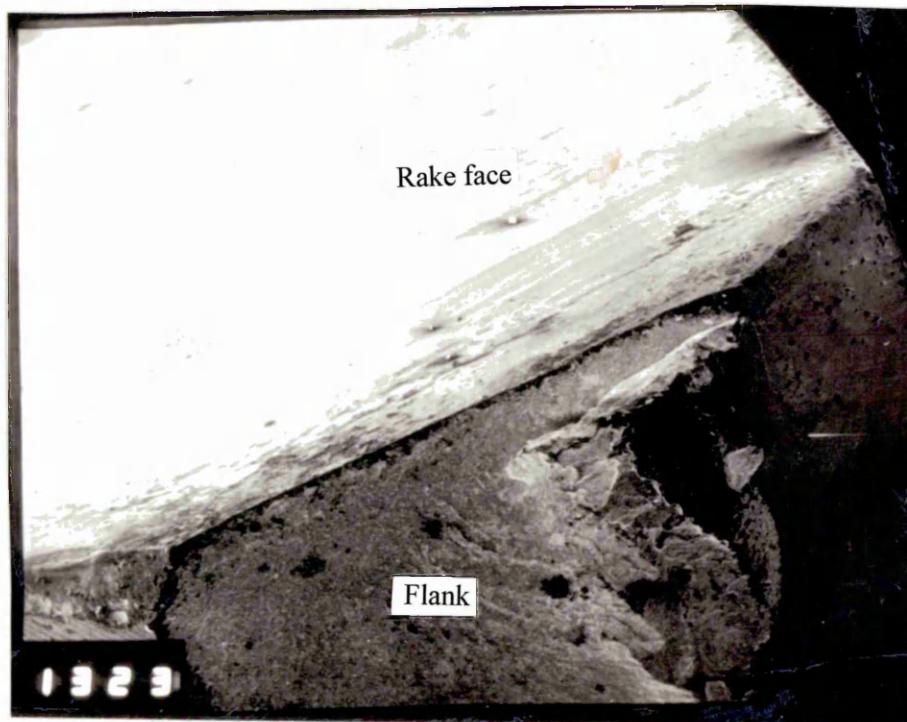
The fracture suddenly produced at high compressive stress leading to the edge depressed
